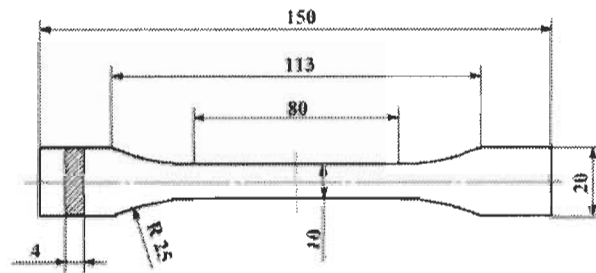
Specimens dimensions (in millimeters) according to the standards of ISO 527-4(1A).
